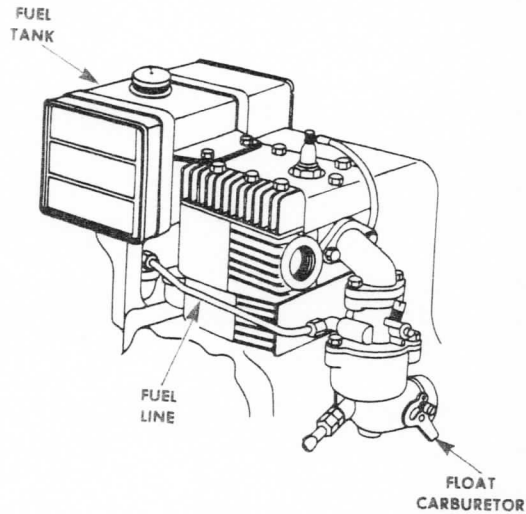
The fuel tank is mounted above a float carburetor. (Briggs & Stratton Corp.)
